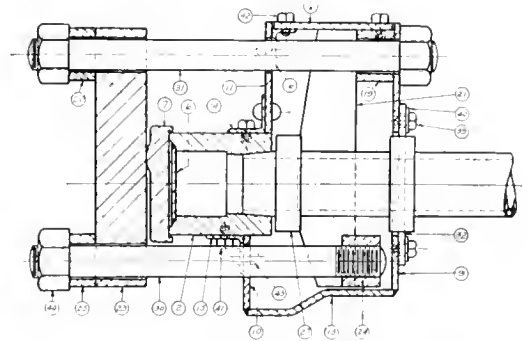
Sectional View of Lower Main Header, Mercury Boiler
